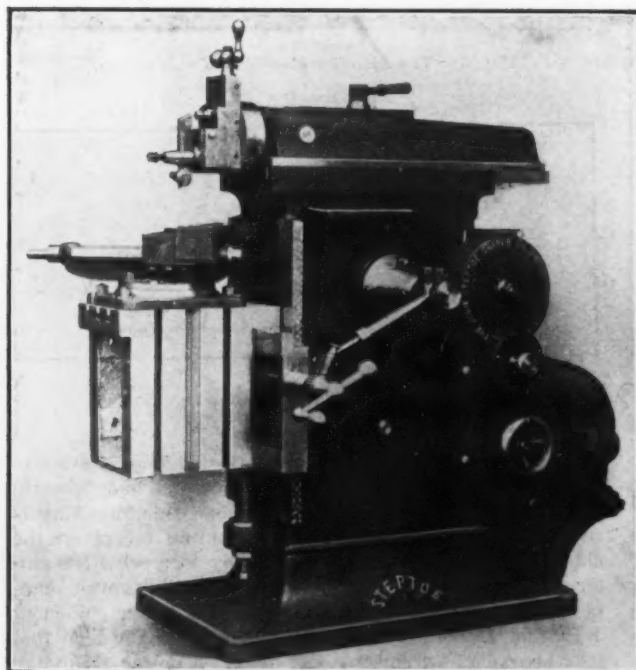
A New Shaper Motor Drive Designed by the John Steptoe Shaper Company, Cincinnati, Ohio.
